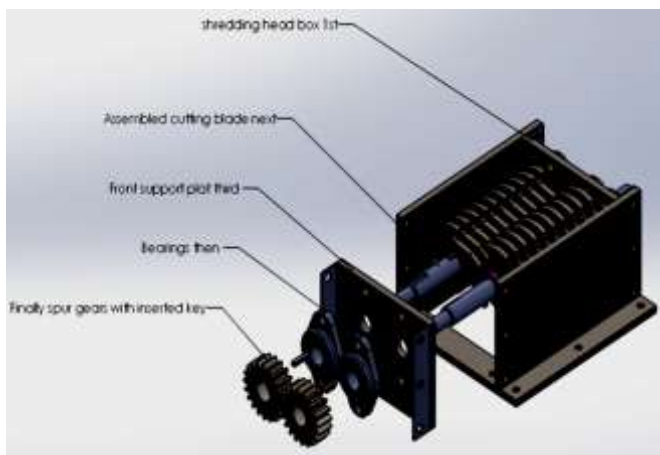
Fix cutting blades ,bearing, gears with shredding box
